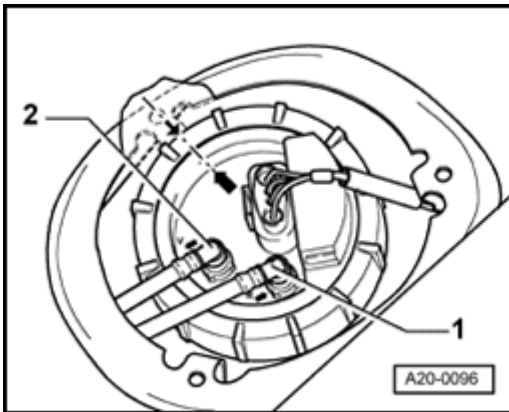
Installed Position Of Flange Of Fuel Delivery Unit
